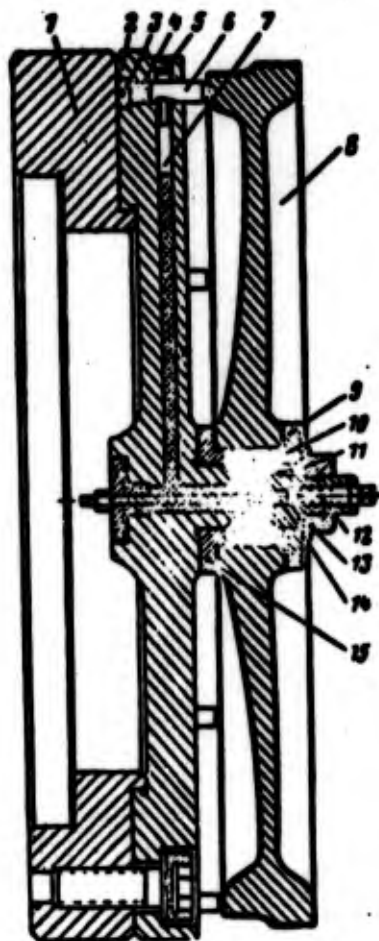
Device for the machining of disks of turbines: 1 - ring; 2 - casing of the device; 3 - screw; 4 - spring; 5 - plug; 6 - set support; 7 - stop; 8 - disk to be treated; 9 - washer; 10 - hydroplastic; 11 - set screw; 12 - working screw; 13 - nut; 14 - plunger; 15 - thin-walled bushing.
